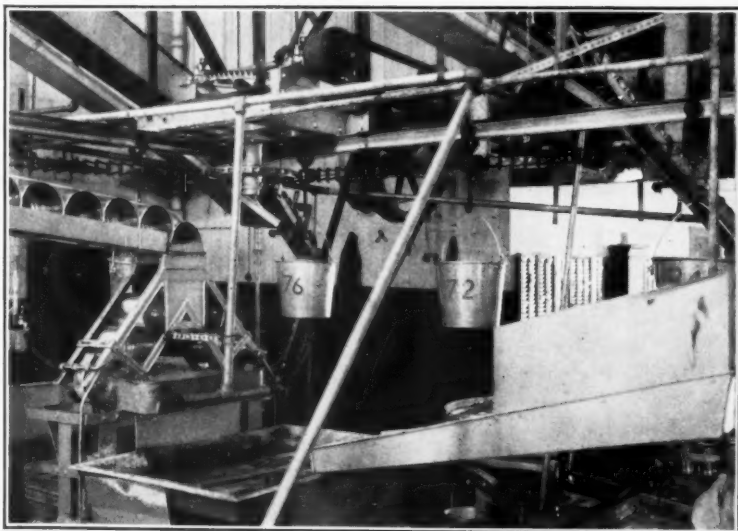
Drive end of a Jeffrey trolley conveyor handling tomatoes in a packing plant. *Courtesy of The Jeffrey Manufacturing Co.
